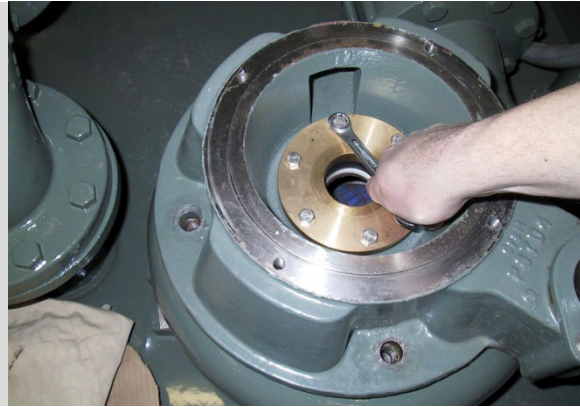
Installing Smaller Quad Ring on The Carbon
